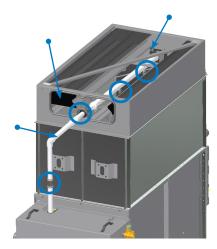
Spray Pipe Install, Upper Pipe and Eliminator Install
